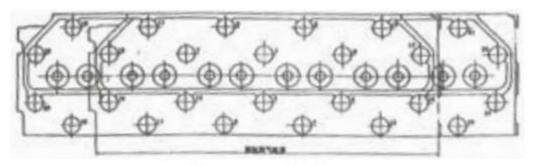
Schematic diagram of cylinder head bolt tightening sequence
